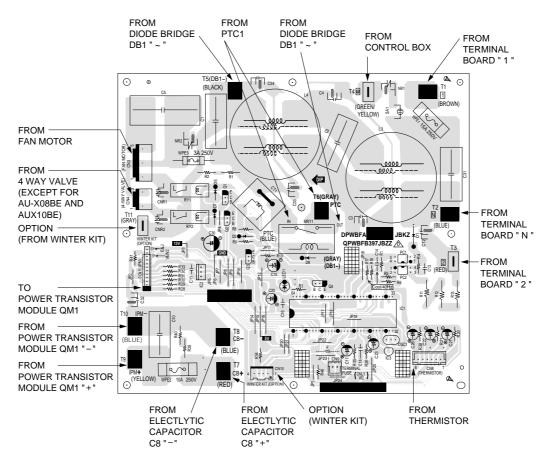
Printed Wiring Board for AU-X08BE/X10BE and AE-X08BE-C/X10BE-C
